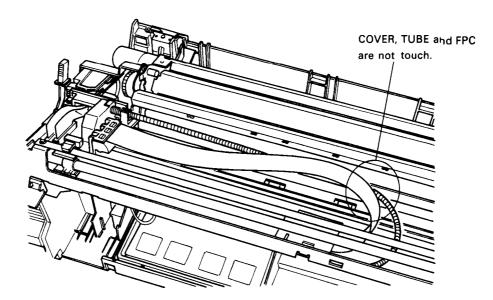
Setting PRESSING PLATE, COVER SPRING, UPPER
